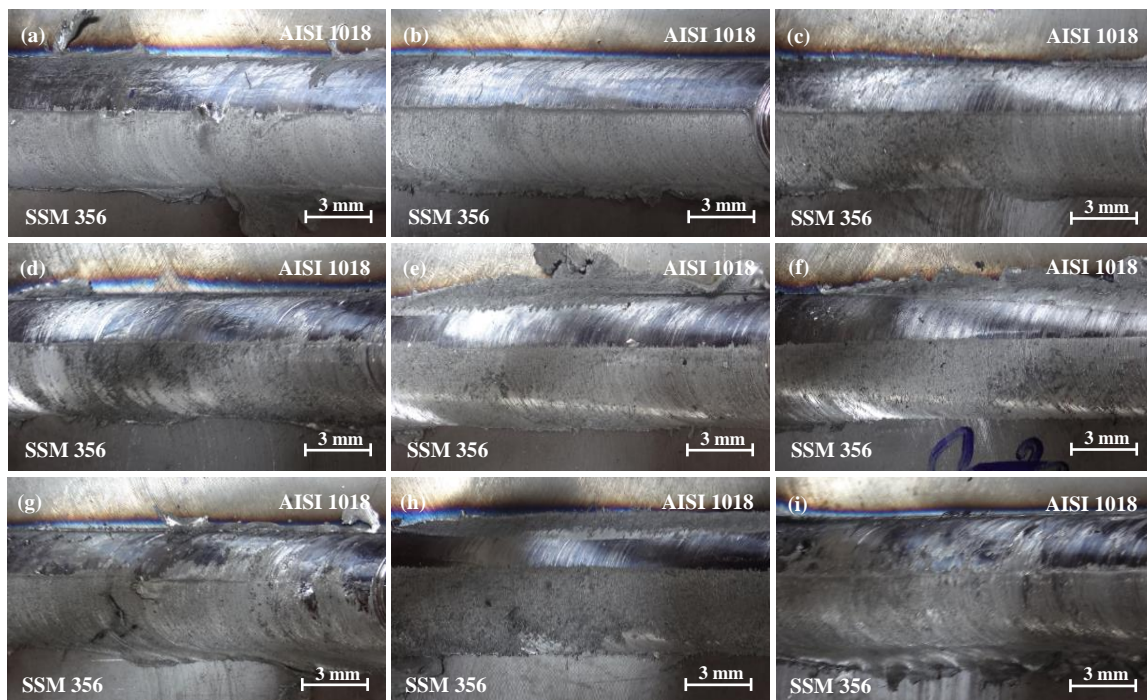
The top surface of the weld for (a) FSW1, (b) FSW2, (c) FSW3, (d) FSW4, (e) FSW5, (f) FSW6, (g) FSW7, (h) FSW8, and (i) FSW9.
